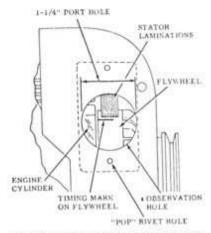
On Models HH80, HH100 and HH120, remove identification plate to observe timing mark on flywheel through port hole in blower housing.
